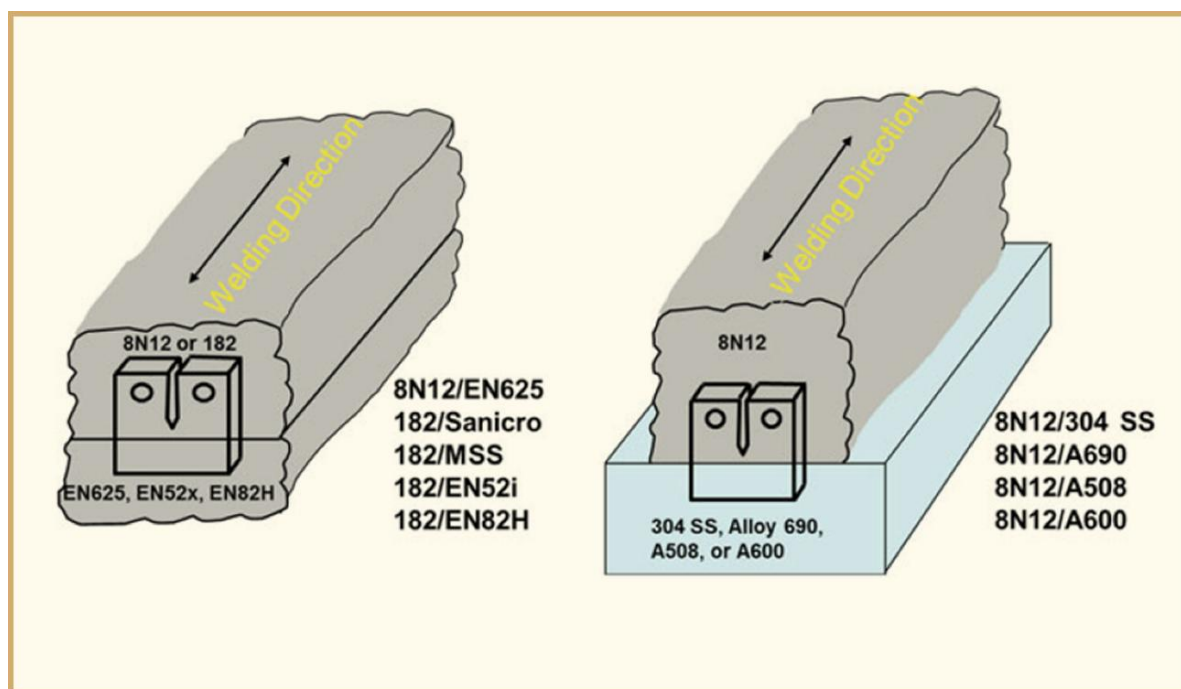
Schematic view of weld cradles used in the composite arrest test. 8N12 was welded atop of all materials [Morton et al., 2017].
